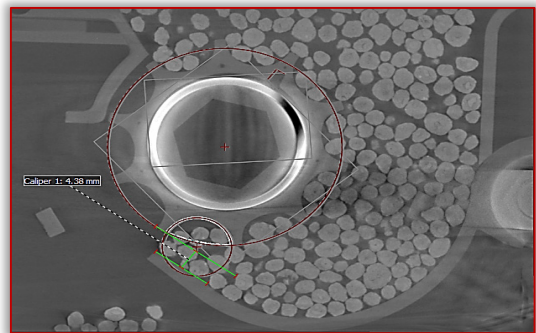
Dispenser cross-sectional view 4.38 mm gap measured between the roller and adjustable bottom flap
